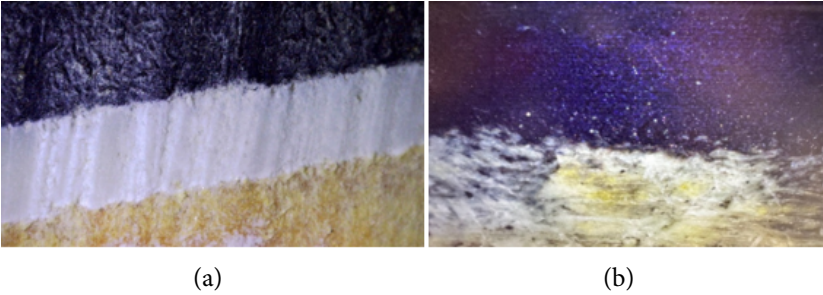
The optical microscope images of a) adhesively bonded b) IR welded sample
